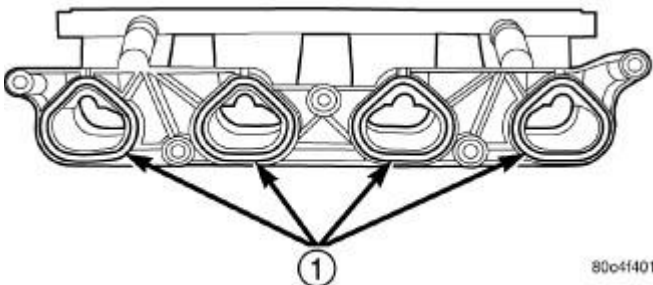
Lower Intake Manifold Seals - Naturally Aspirated Engine
